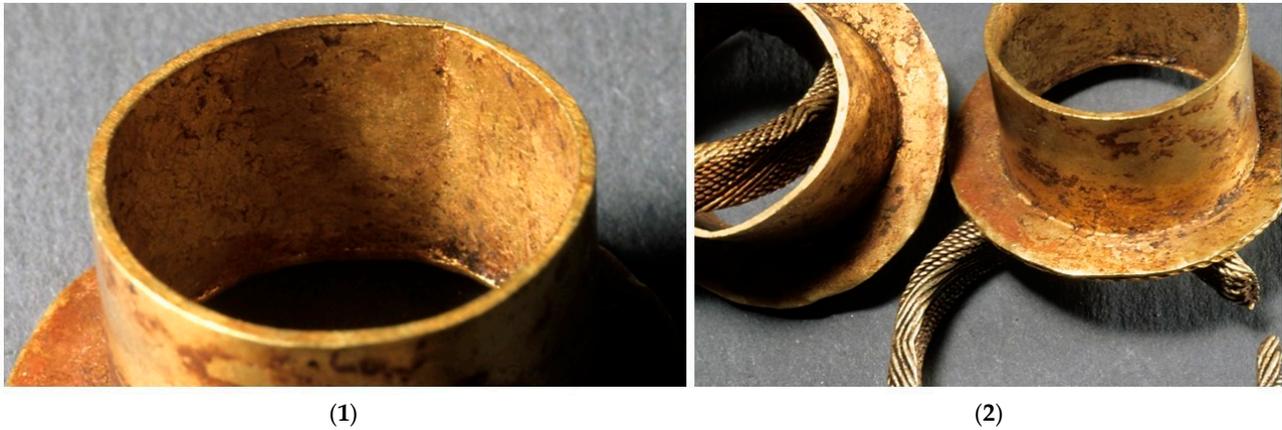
Cylindrically curved and disc-shaped sheet-metal parts of the woman's ear ornaments, (1) soldered joint of the cylinder, and (2) soldered connection between the vertical and horizontal sheet elements. Photos by B. Armbruster.
